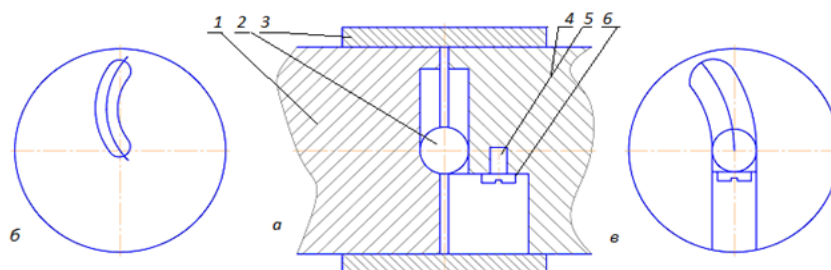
Ball overrunning clutch with a spring: 1, 4 - shaft ends; 2 - ball; 3 - sleeve; 5 - screw; 6 - spring element.
